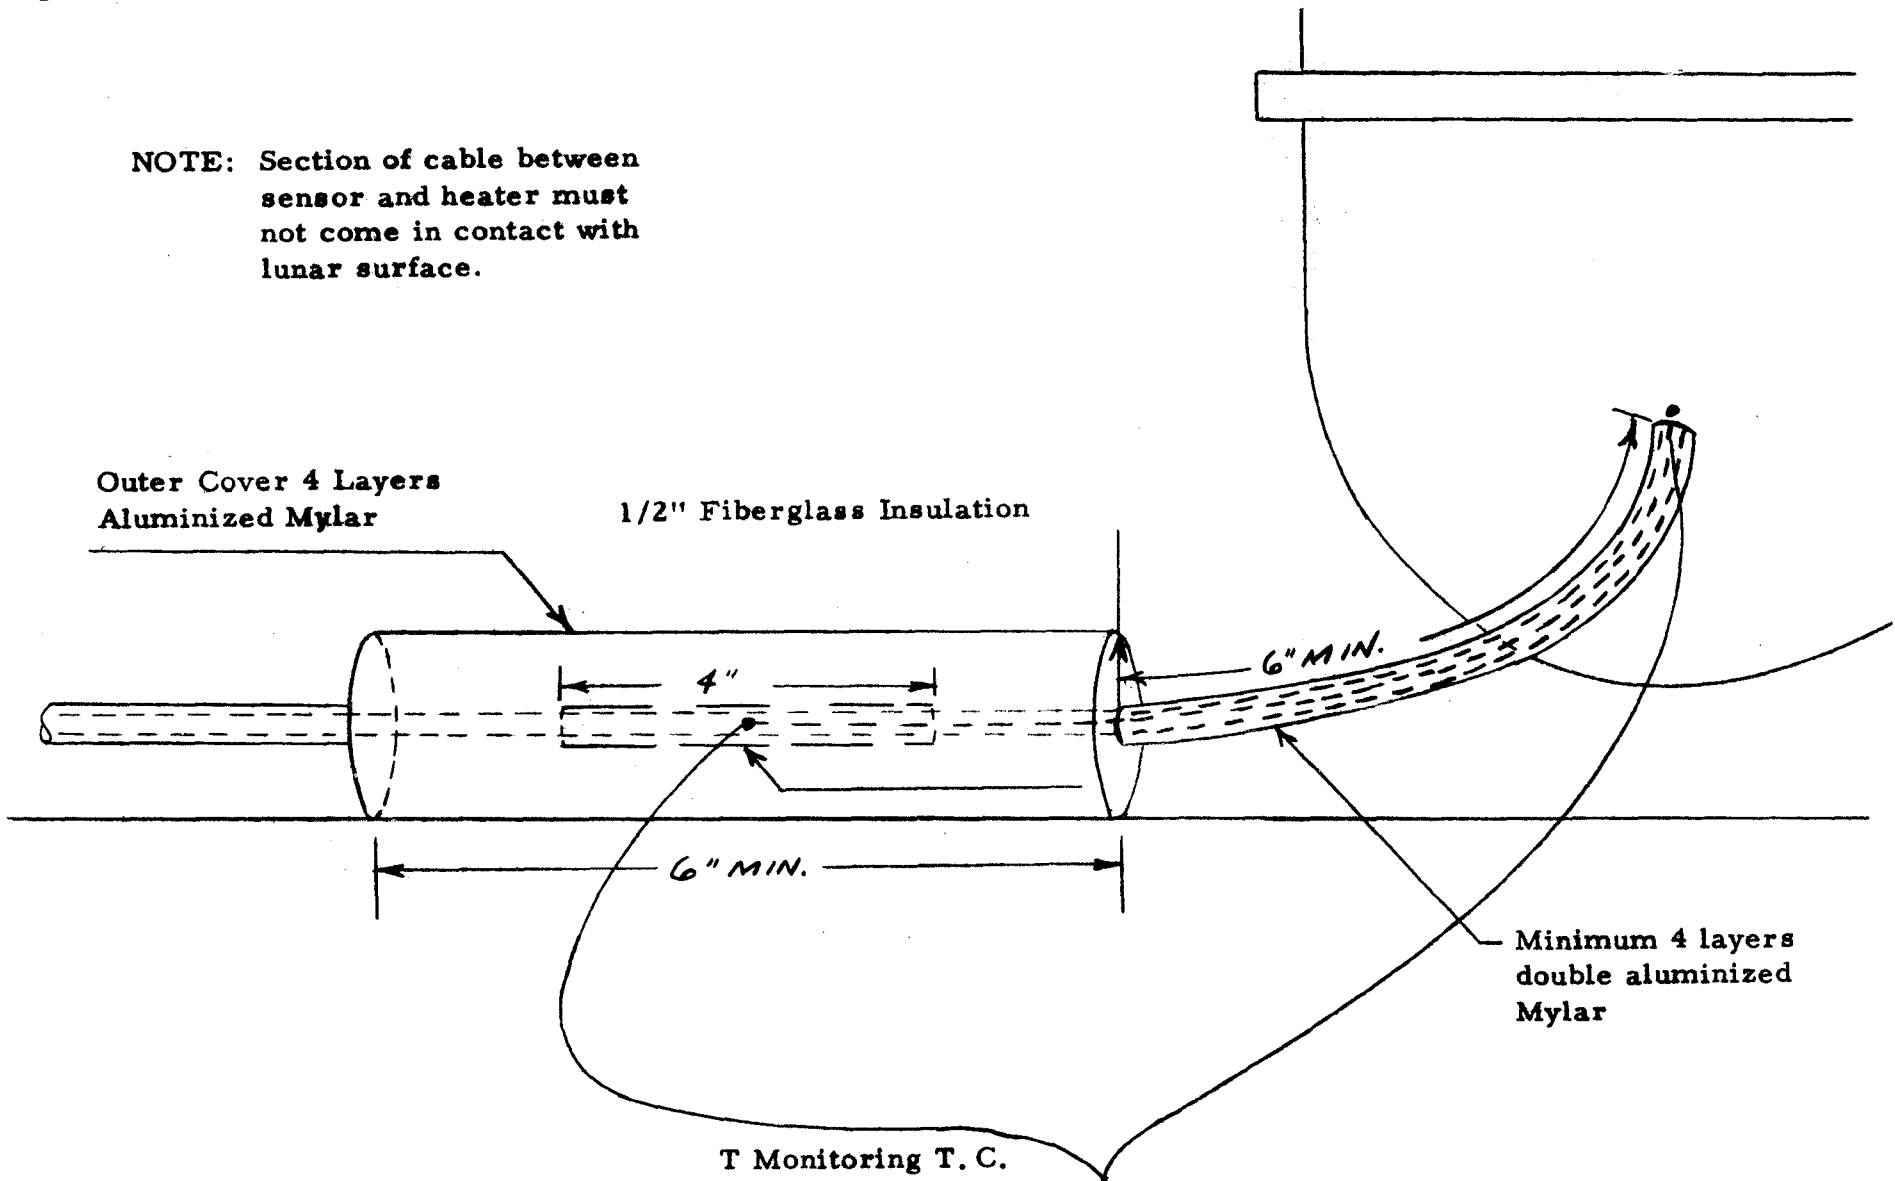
PSE Sensor Exciter Cable - Guard Heater - Qual A Test
